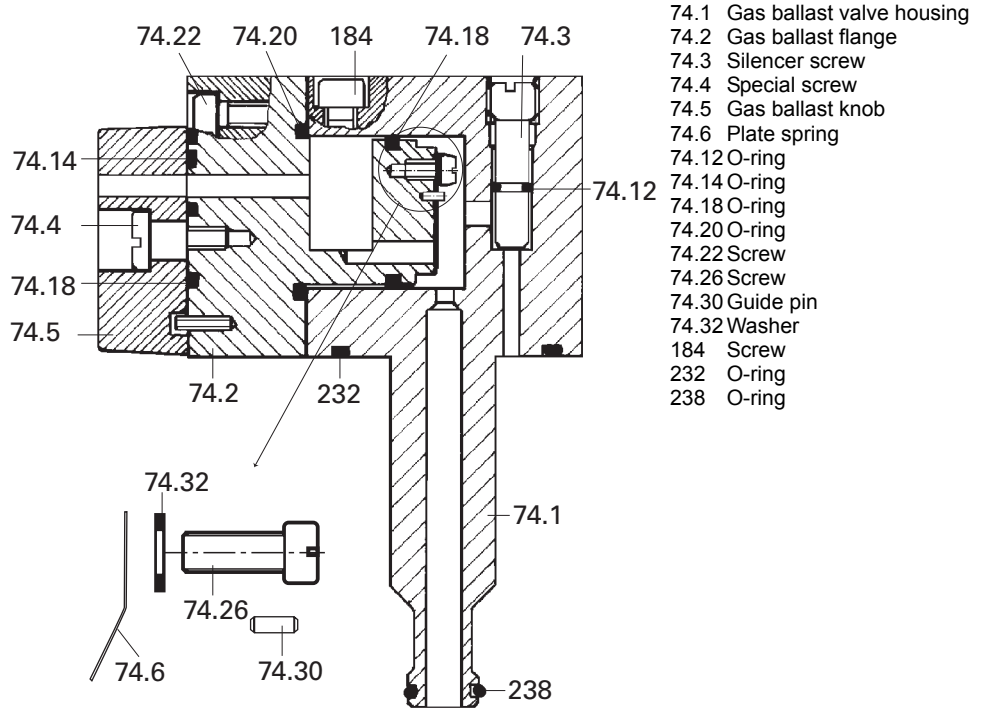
Gas ballast valve standard version 74, PK 223 664-U
